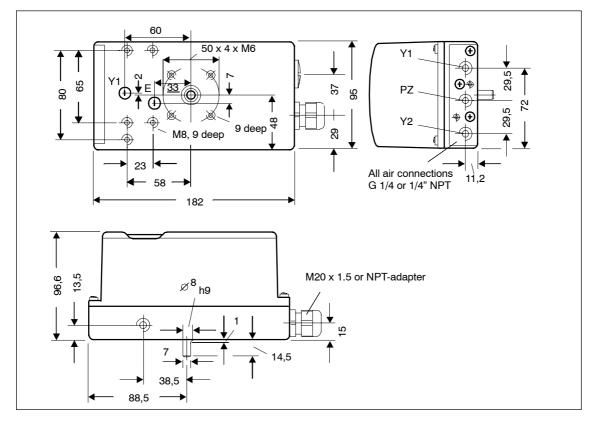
Dimensional drawing version plastic housing 6DR5xx0
